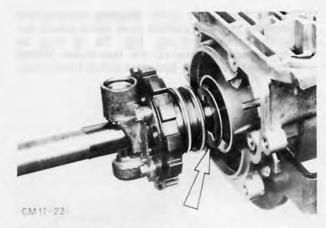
Output shaft complete with governor and thrust washer No. 8
